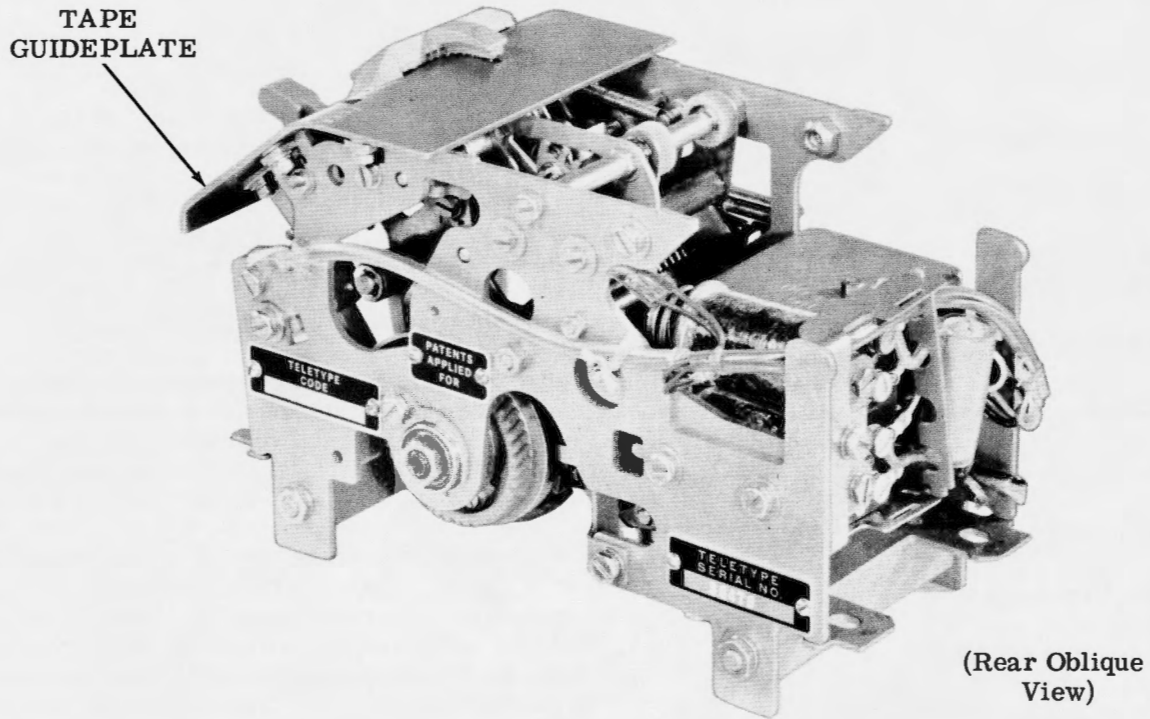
Typical Transmitter Distributor (Cover Plate Removed)
